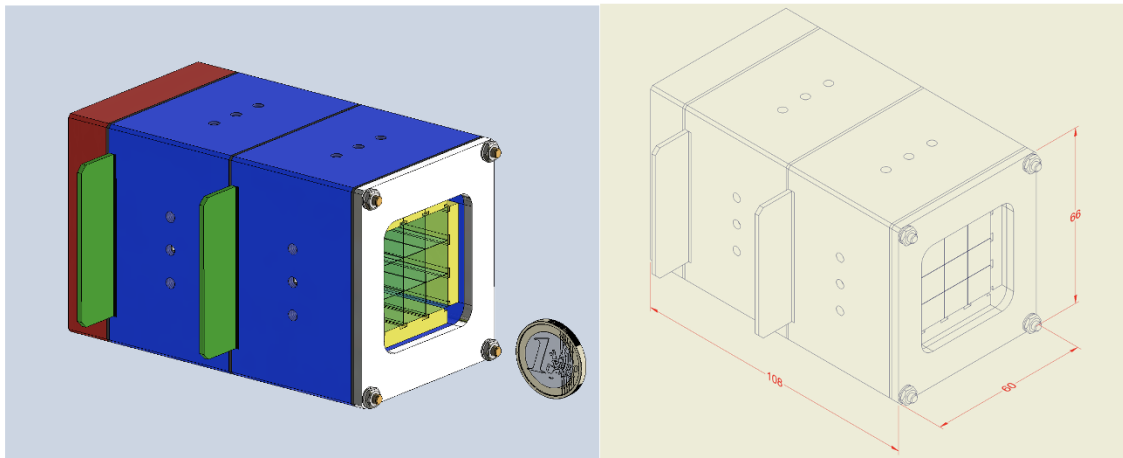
CAD model of Crilin Prototype (left) and total dimensions (right).
